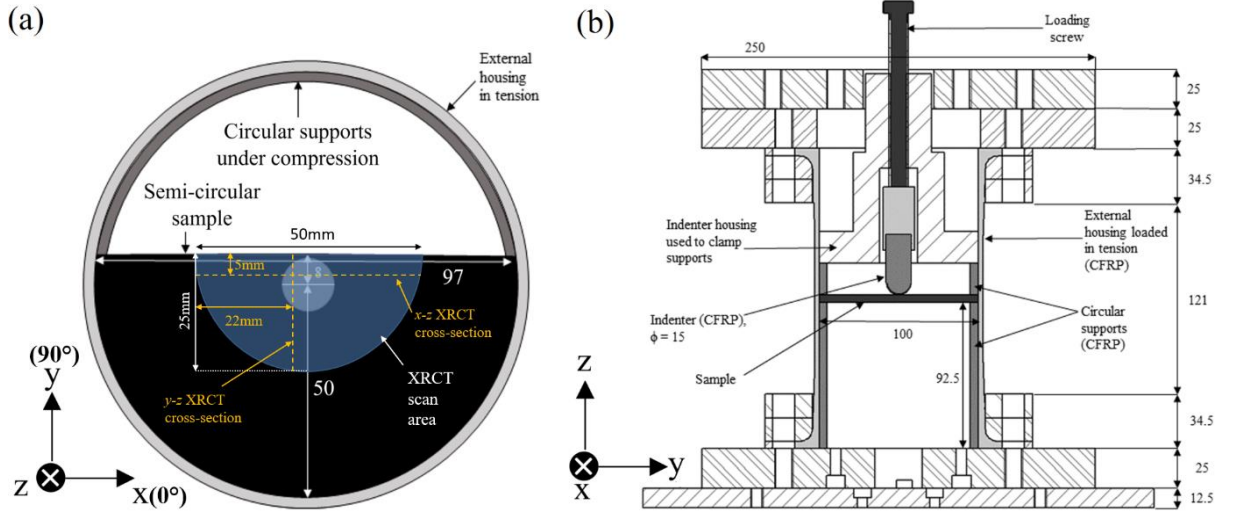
(a) x-y plane cross sectional view of the jig showing supports, indenter and coupon; (b) z-y cross-section of the load stage showing coupon placement and load stage construction.
